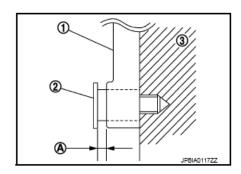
Identifying Slack Guide Mounting Bolt Gap Courtesy of NISSAN MOTOR CO., U.S.A.
